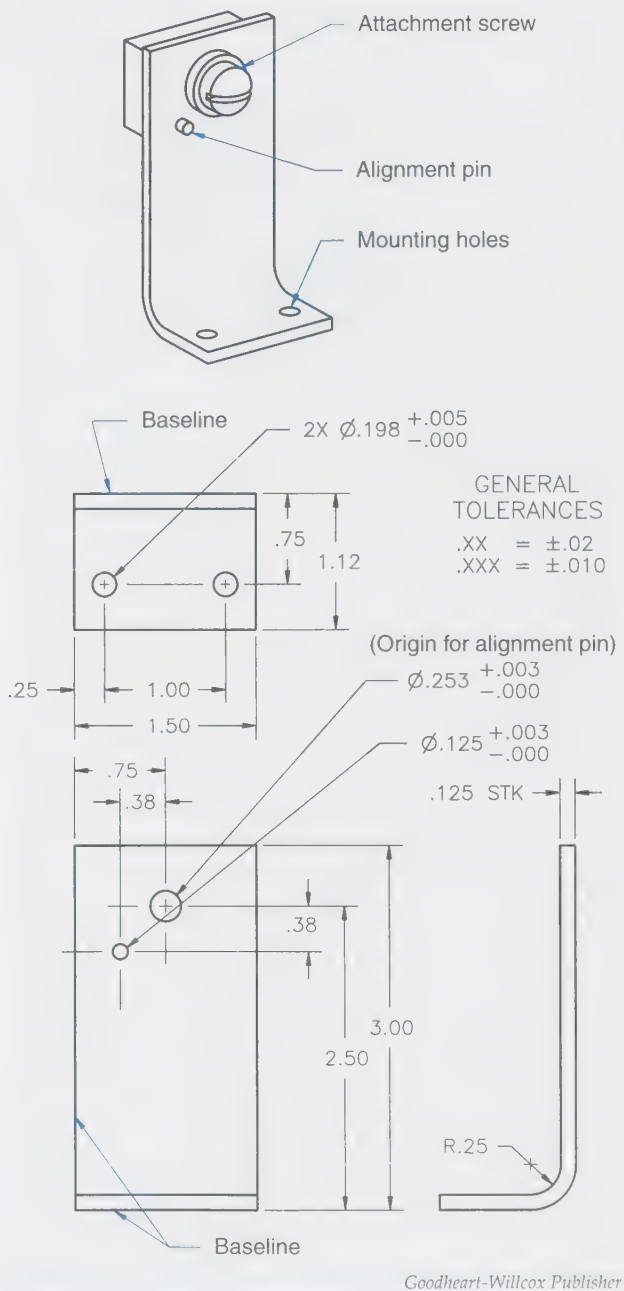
A combination of baseline dimensioning and chain dimensioning can reduce tolerance accumulation on a part.
